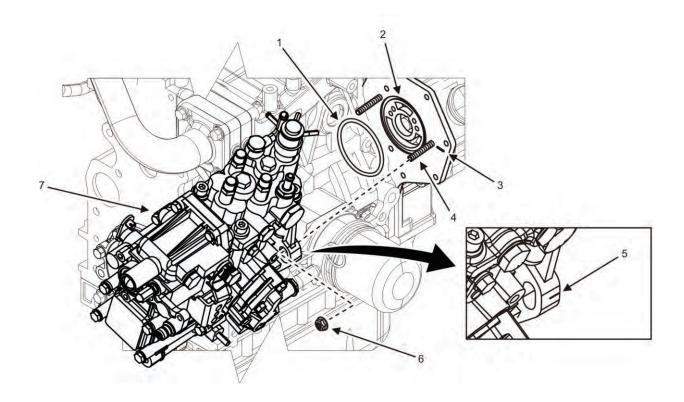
Fuel Injection Pump and Mounting Flange Adjustment.
